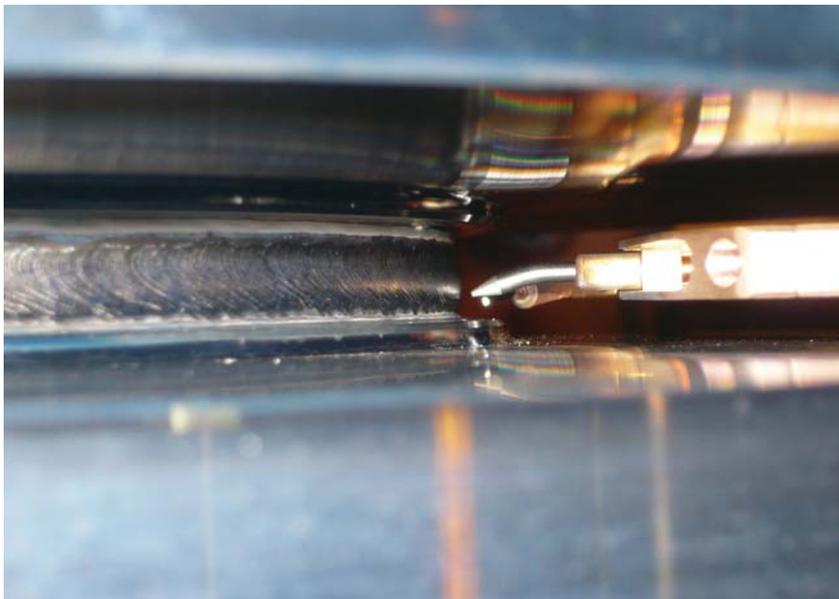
Narrow groove with introduced torch after root pass has been welded.
